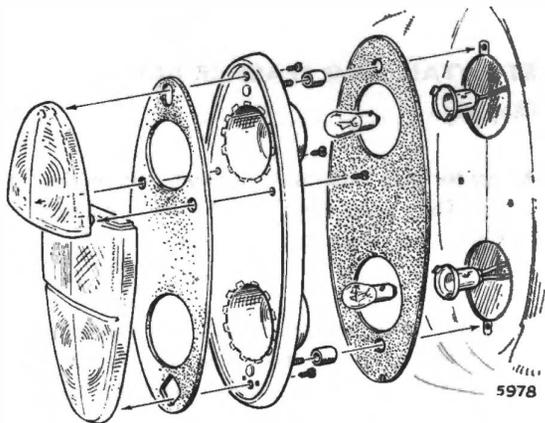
Exploded view of stop/tail and rear flasher lamps
